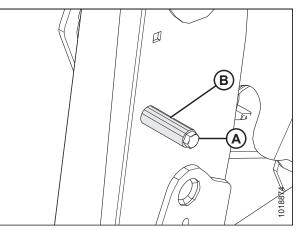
Bolt and Spacer Installed on Windrower Leg
